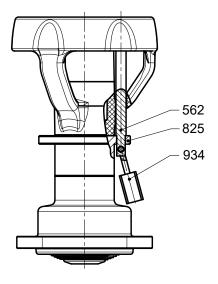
Upper section of the diaphragm valve with handwheel locking device and padlock MD 40 - MD 115 $\,$
